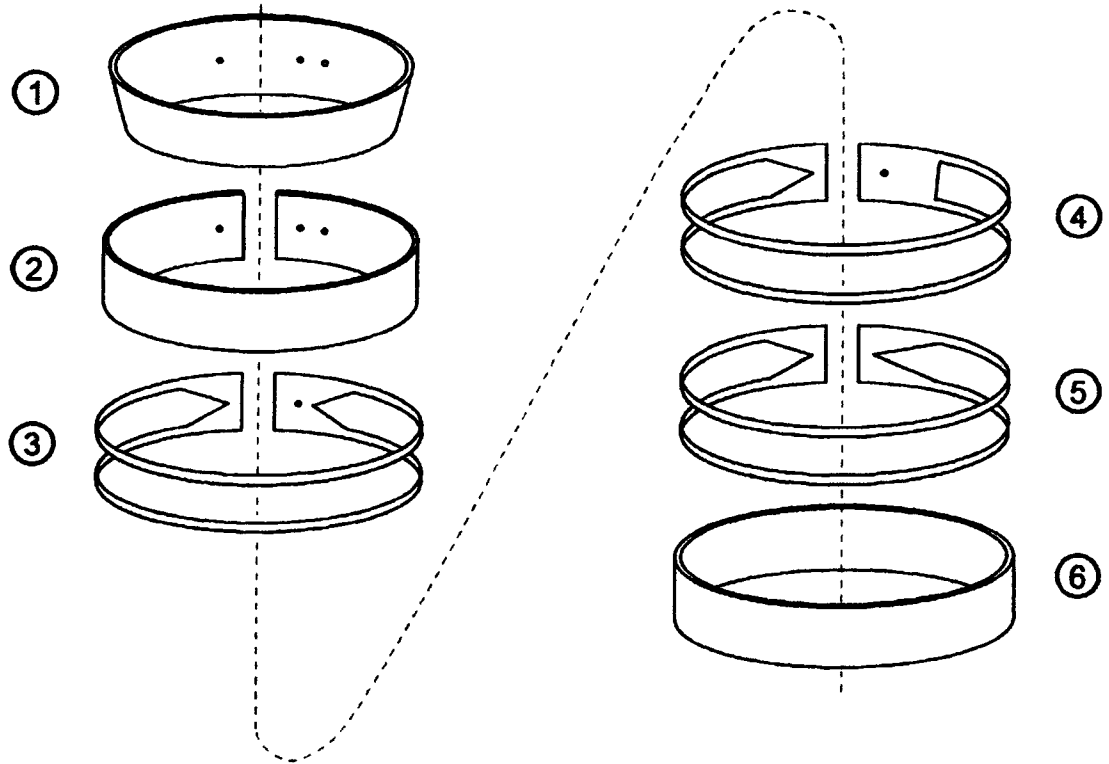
The layers of the channel design: (1) aluminum expansion ring, (2) stainless steel inner cylinder, (3) inner Mylar strip, (4) stainless steel splitter strip, (5) outer Mylar strip, (6) stainless steel outer cylinder.
